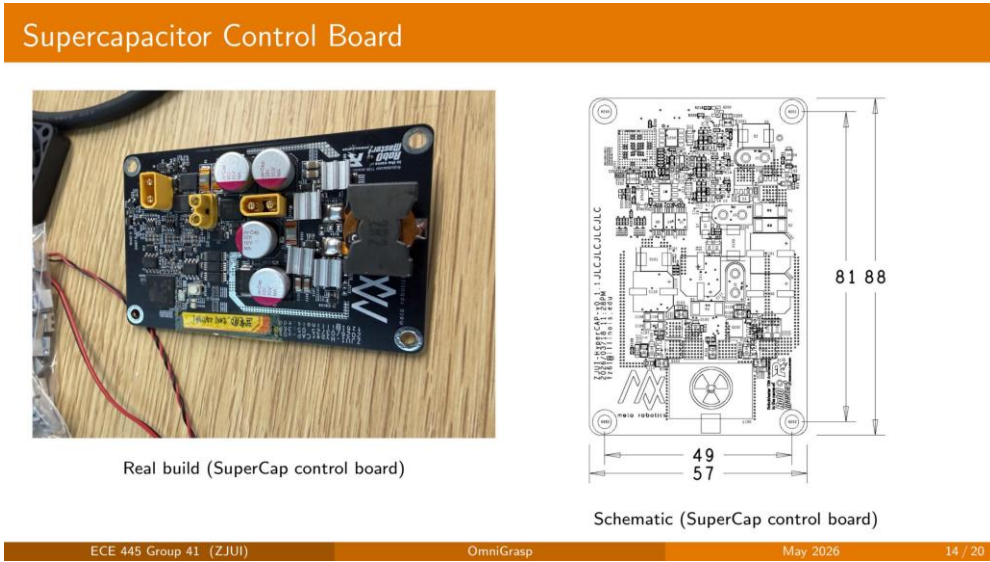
Supercapacitor control board: real build and PCB outline/dimension drawing.
